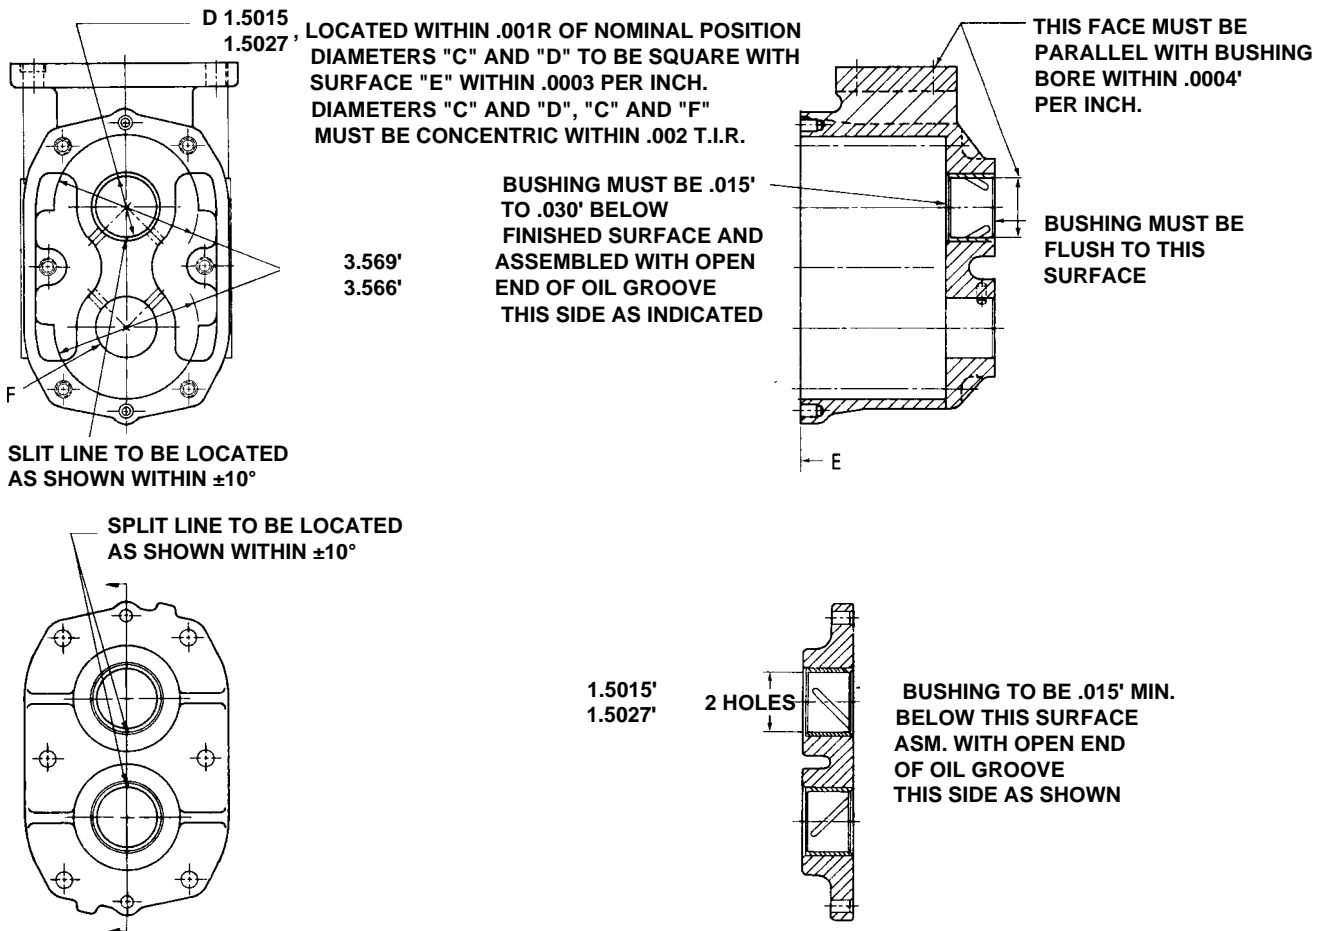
Location and Position of Oil Pump Bushing (8V Engines)
